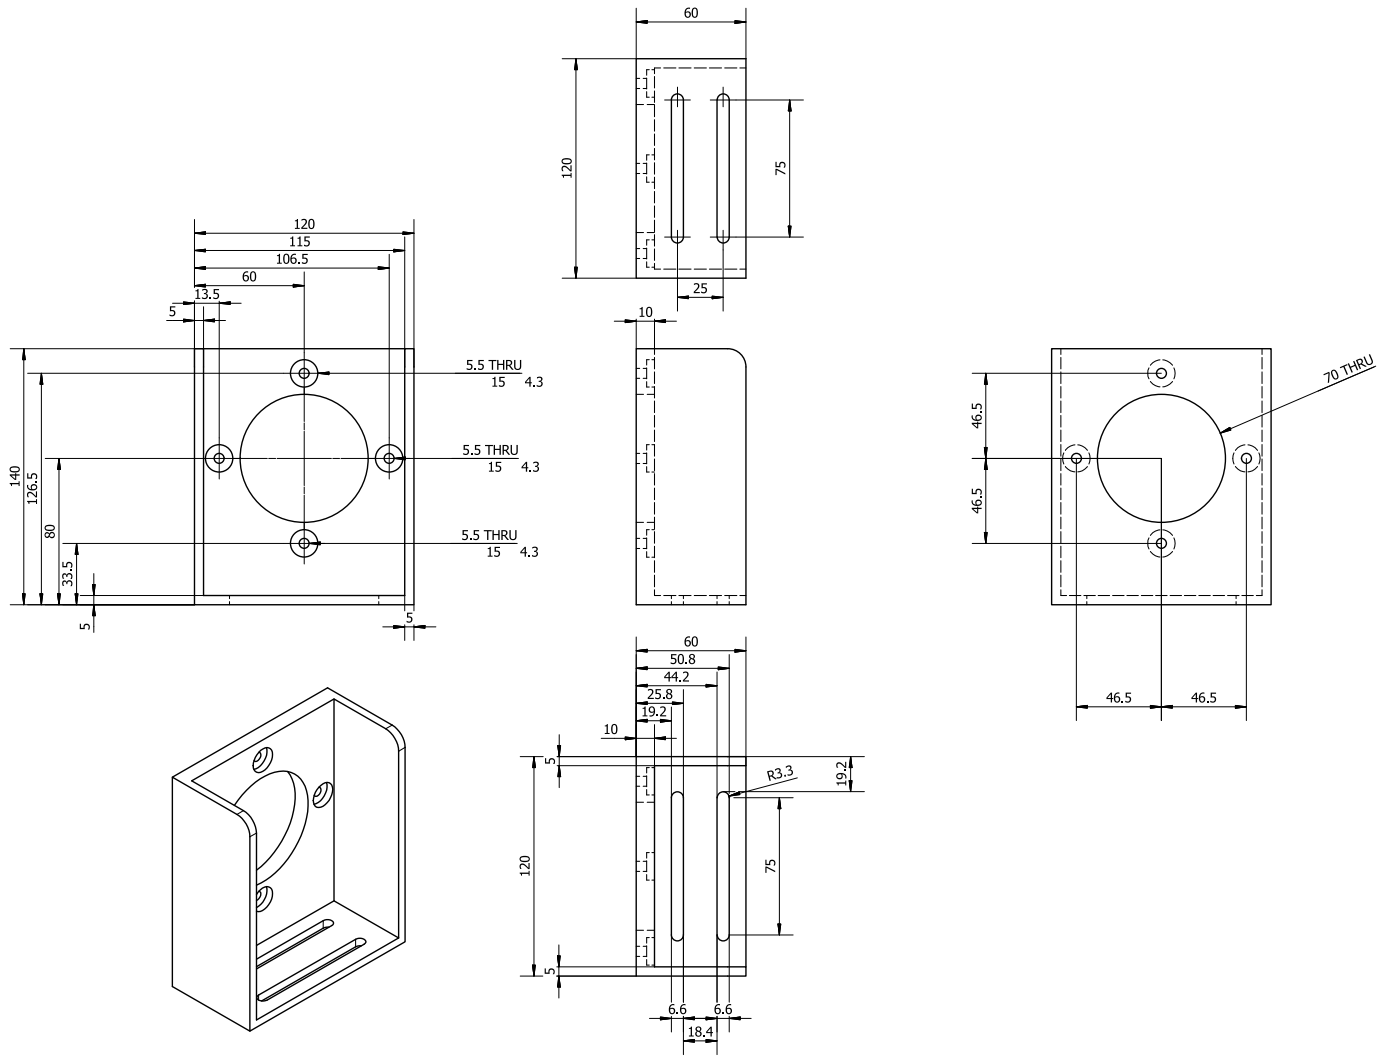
Technical drawing of the camera mount. Material: aluminium.
